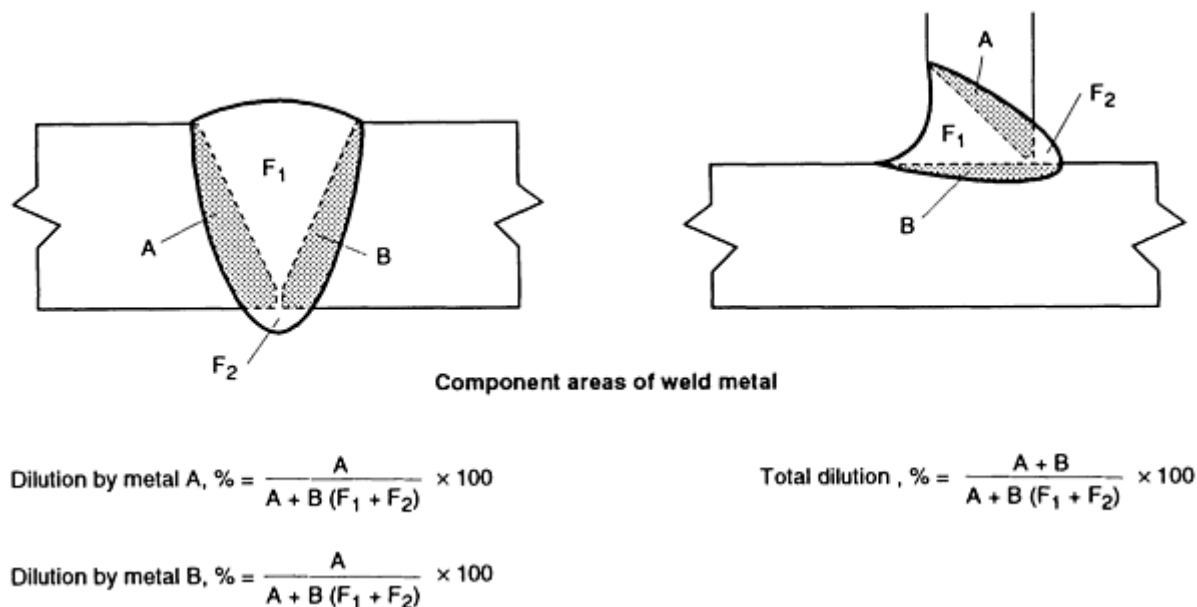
DILUTION IN A DISSIMILAR-METAL WELDED JOINT. SOURCE: REF 33
